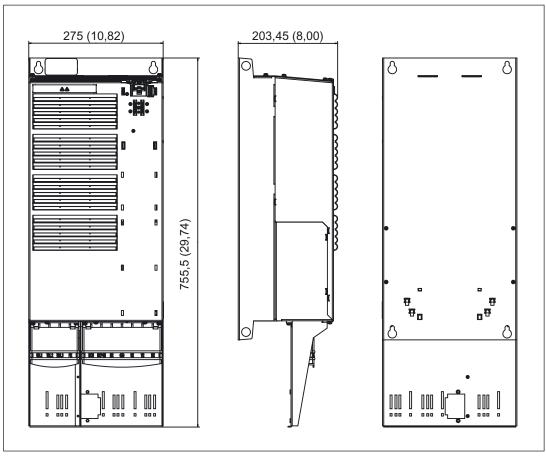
Dimension drawing: Power Module PM340 with Screening Kit, frame size FSE
